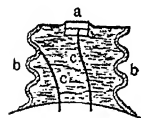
LAMP END FOR EDISON SCREW SOCKET.
